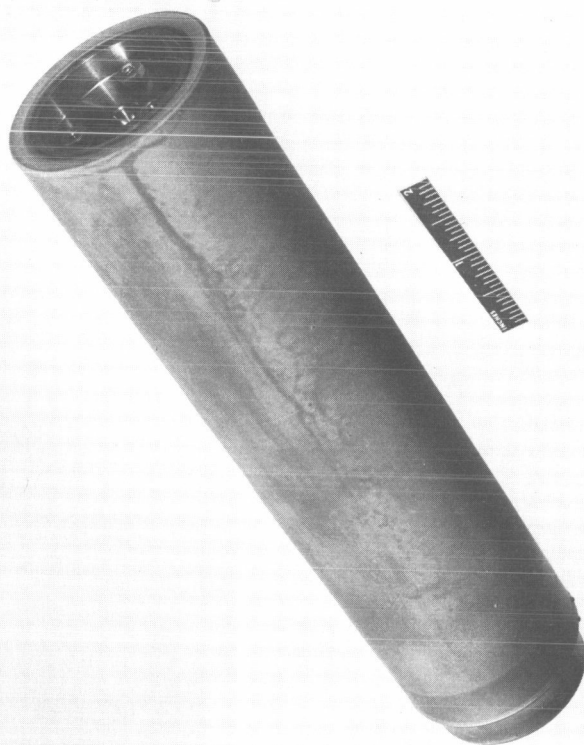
BAND ATTACHMENT ASSEMBLY PRIOR TO DEPOSITION.
